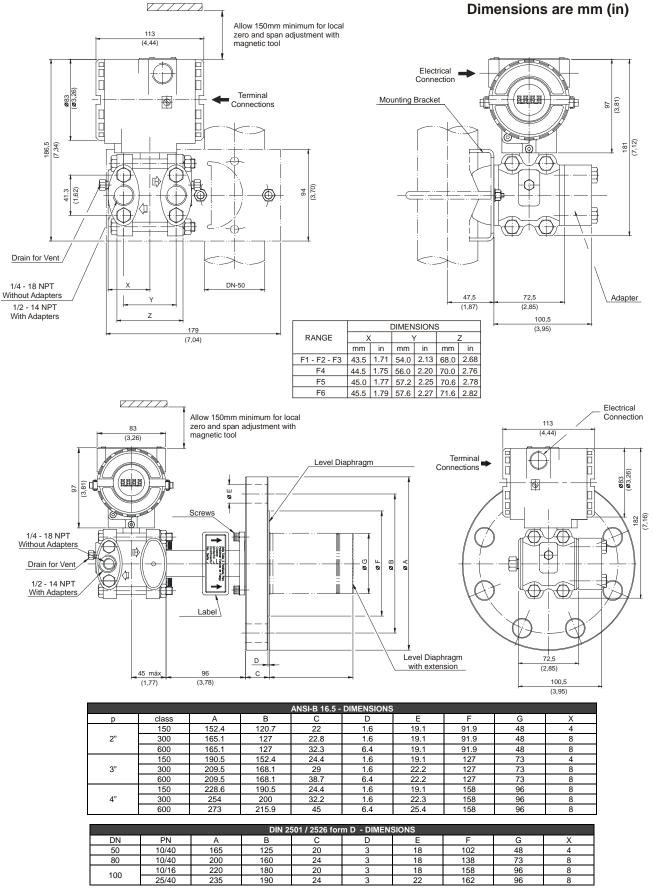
Dimensional Drawing and Mounting Position for LD301
